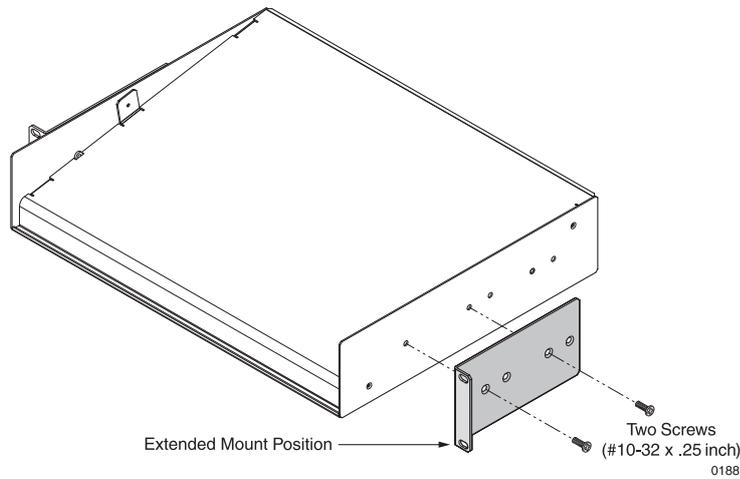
Installing Air Ramp Brackets for the Extended Mount Position
